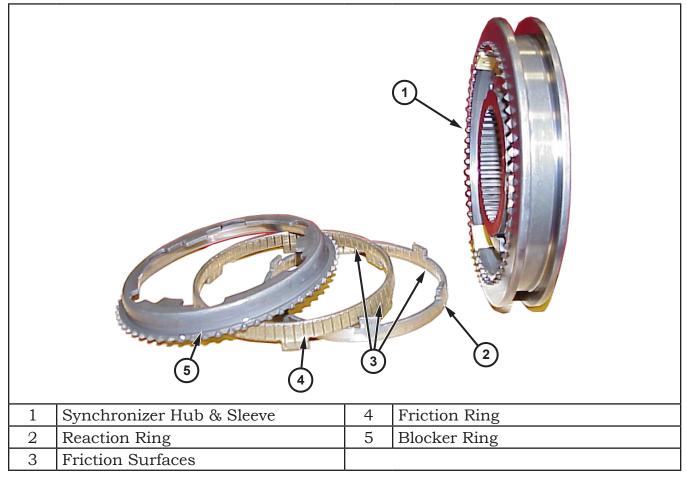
TR6060 Triple Cone Synchronizer Assembly
